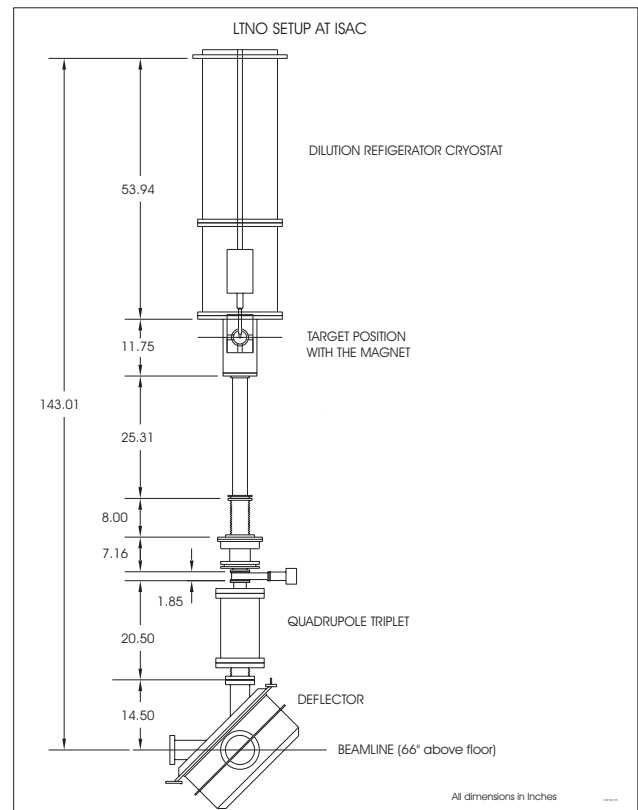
Elevation view of the LTNO cryostat and vertical beam line section.
